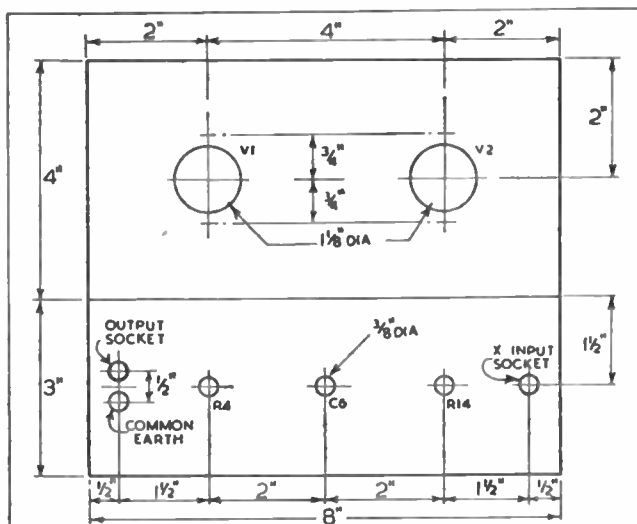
CHASSIS LAYOUT OF THE WOBBULATOR
